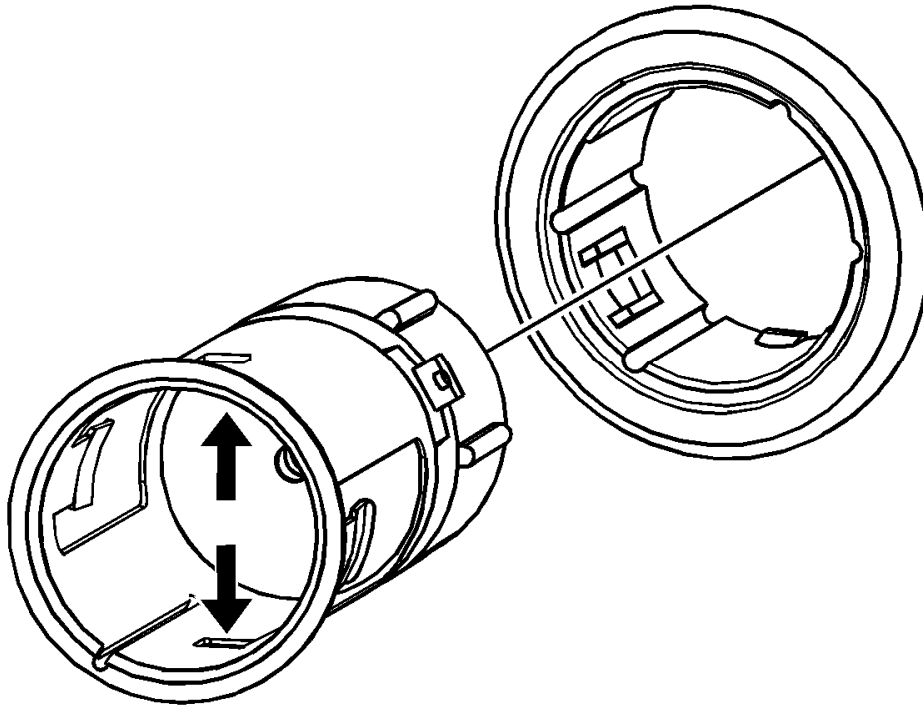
View Of Cigar Lighter Socket/Accessory Power Outlet
